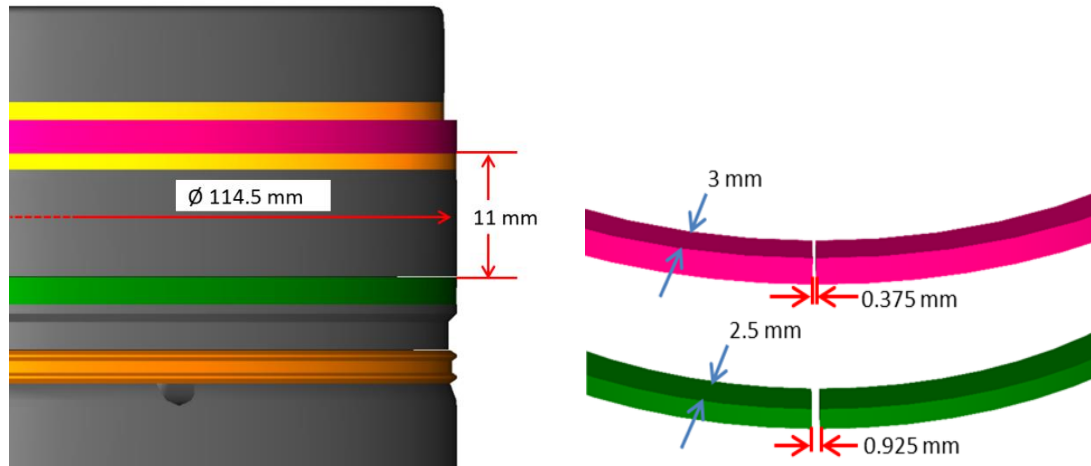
Geometrical dimensions of piston, ring and liner.
